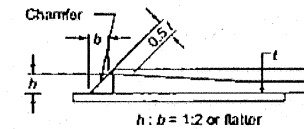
End fillet weld normal to the direction of force
